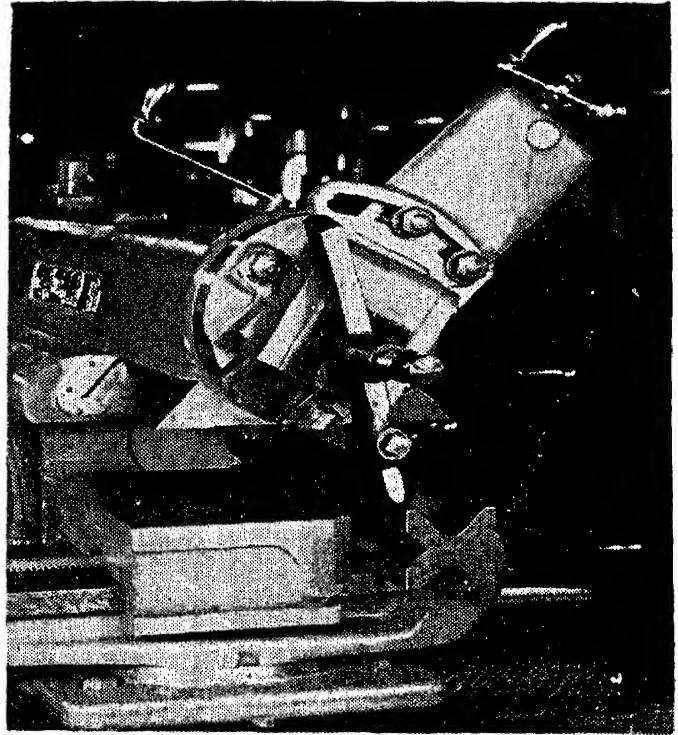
A view of the toolhead and clapper box swivelled on a shaper to machine an inclined surface. (Courtesy The Cincinnati Shaper Co.)
